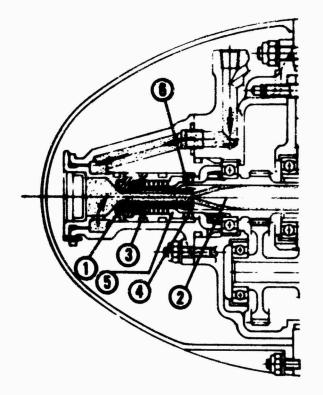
Continental Model 357-1 Engine Fuel Tube Seal.
